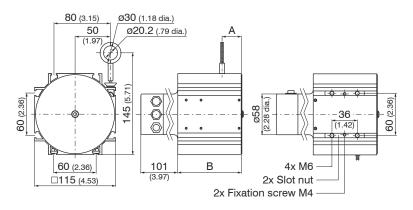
Dimensional drawing ... - FD115 - CO/PB, dimensions in mm (inches), not to scale
